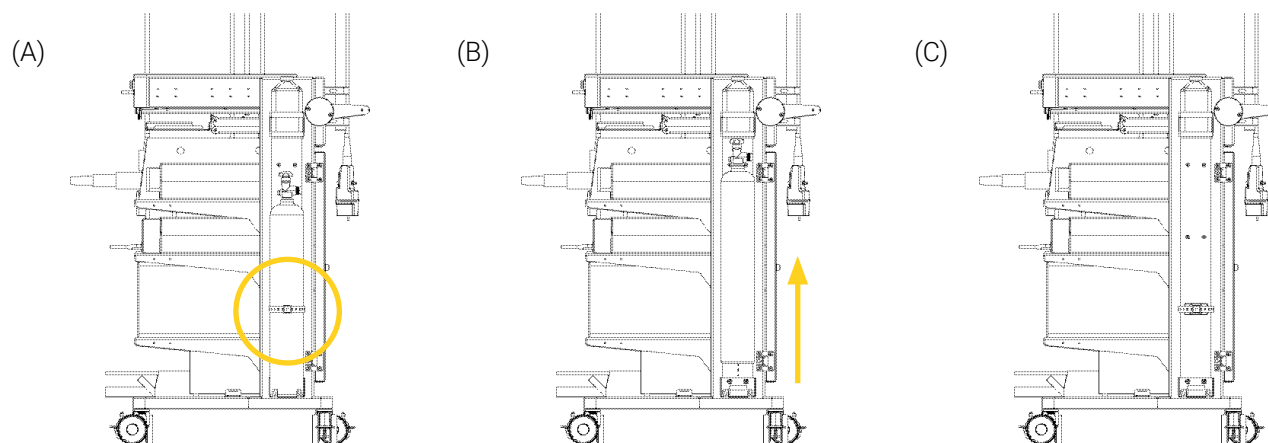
Installation of the gas cylinder in the mounting bracket
